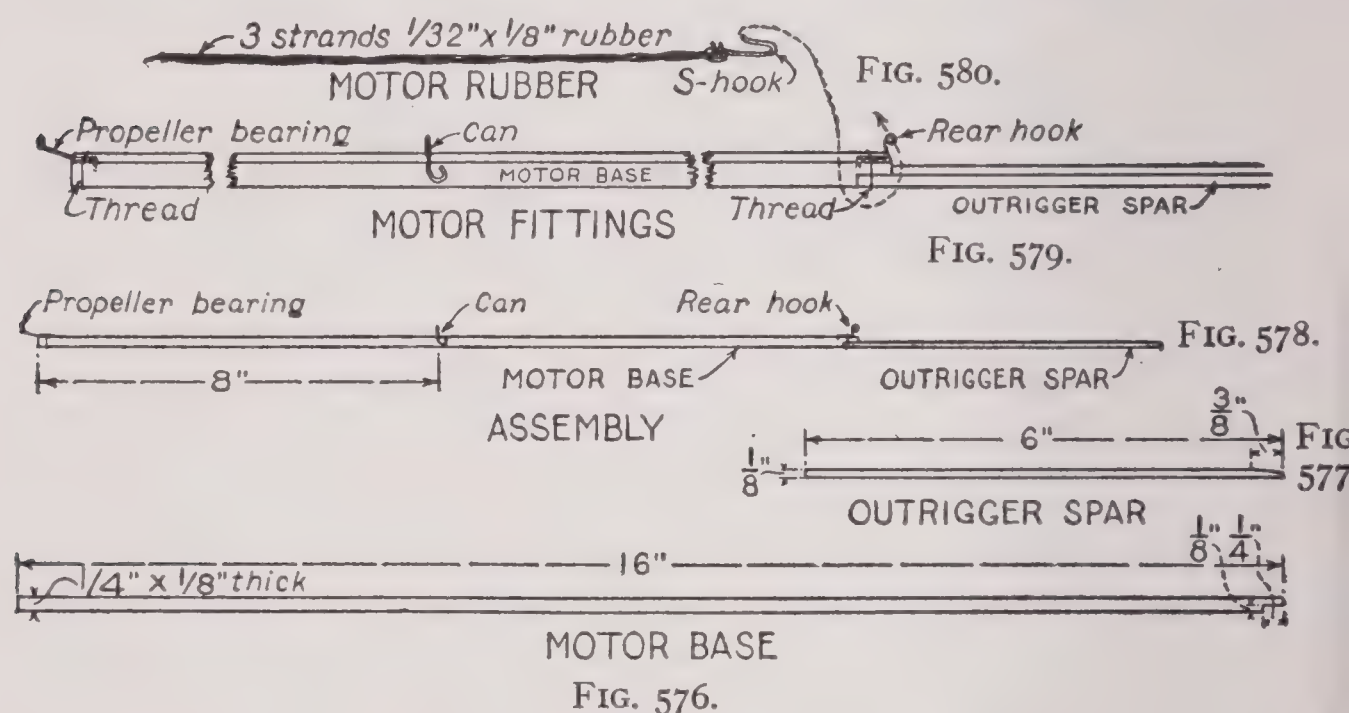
Motor Base. FIG. 577. — Outrigger Bar.
